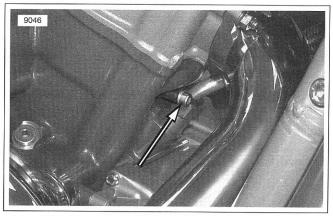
Front Coolant Drain Plug @ 9.7 Nm (86 in-lbs)
